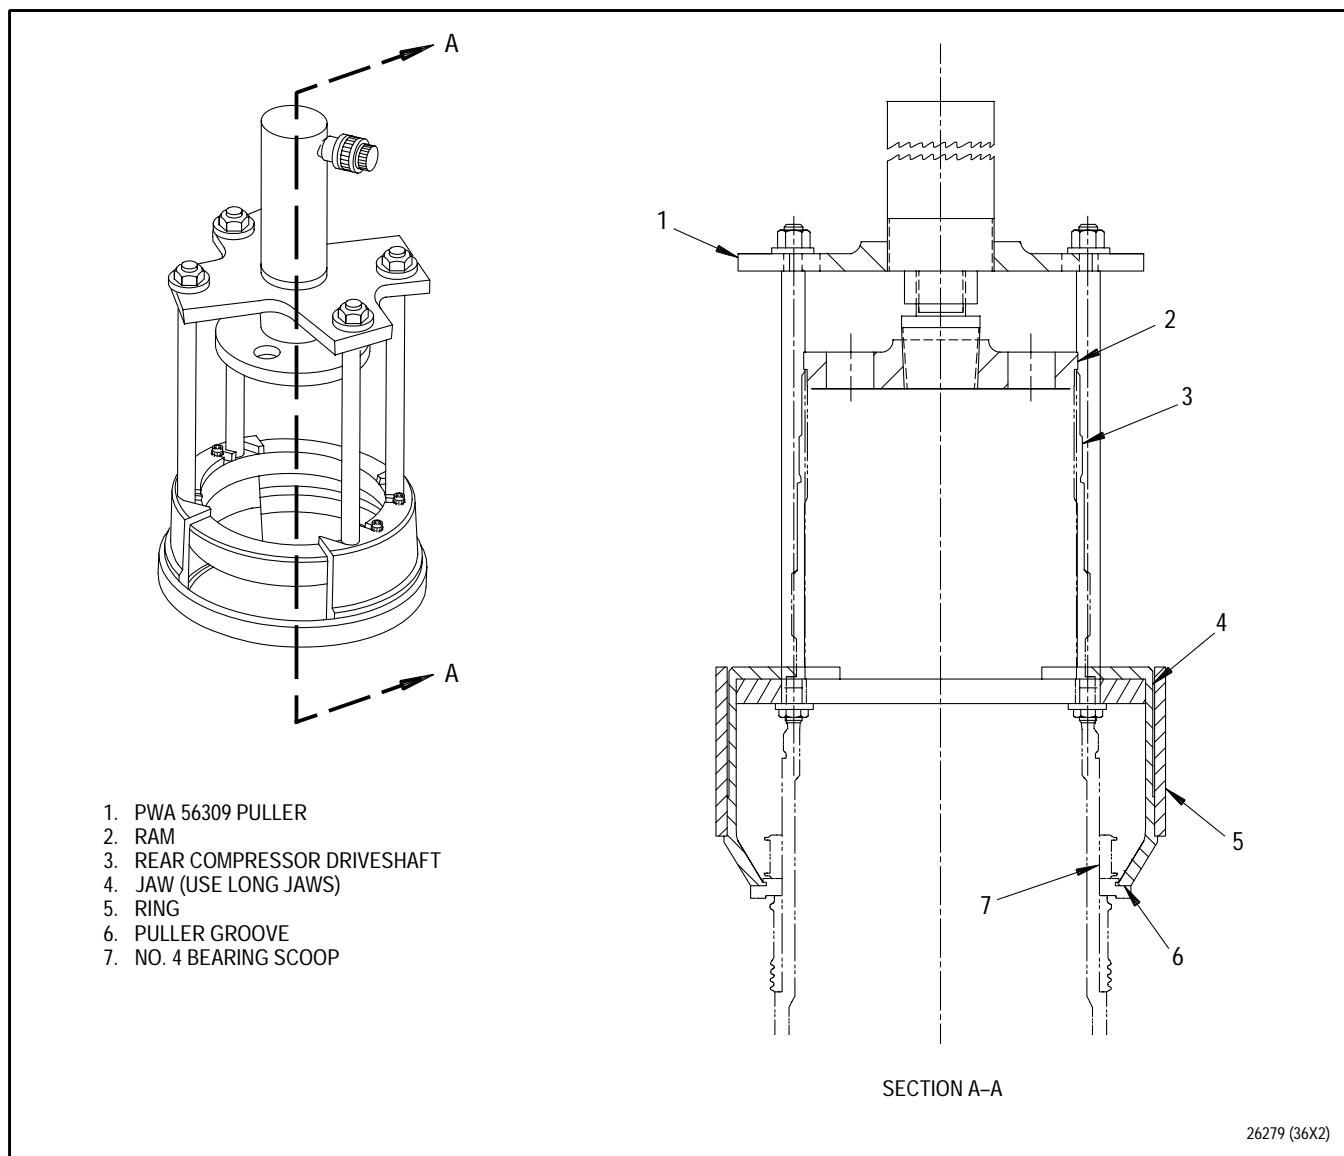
No. 4 Bearing Front Seal Seat - Removal Using PWA 56309 Puller
